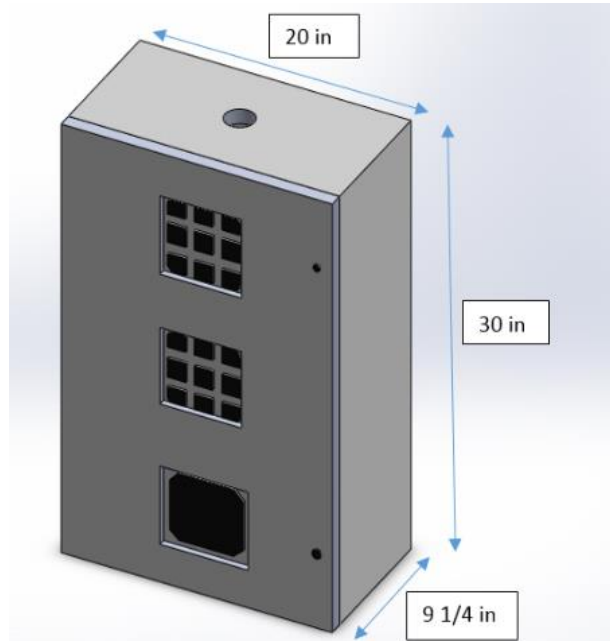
Dimensions of the box used for the UV-T-H testing (9-cell module testing shown in the top two windows and 1-cell dummy module testing shown in the bottom window; humidity is introduced through a hole shown on the top of the box)
